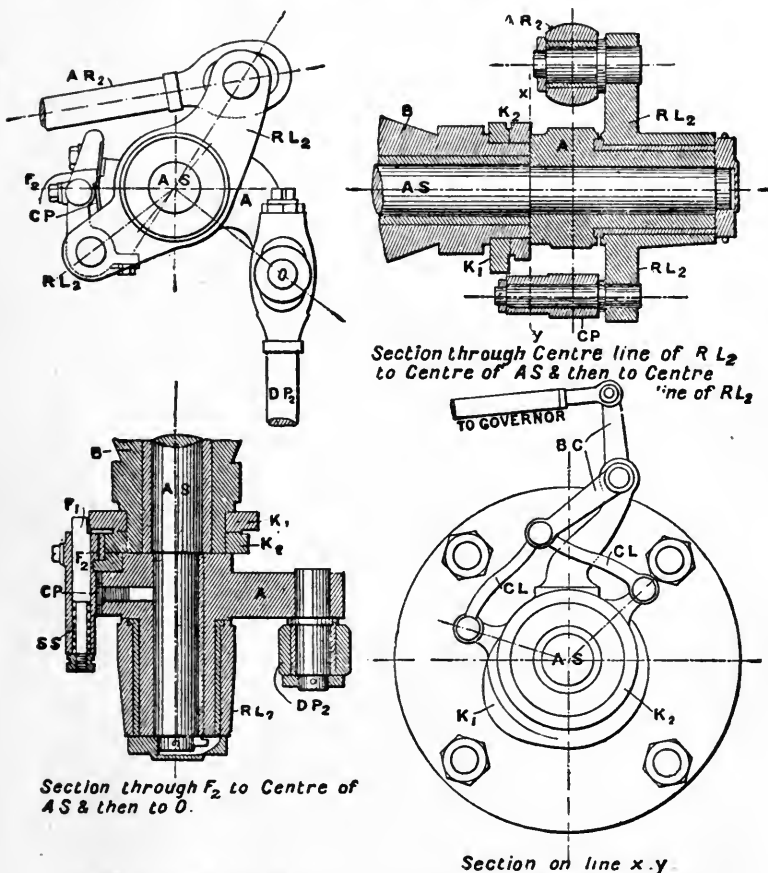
DETAILS OF FARCOT-CORLISS SINGLE ECCENTRIC TRIP VALVE GEAR.
